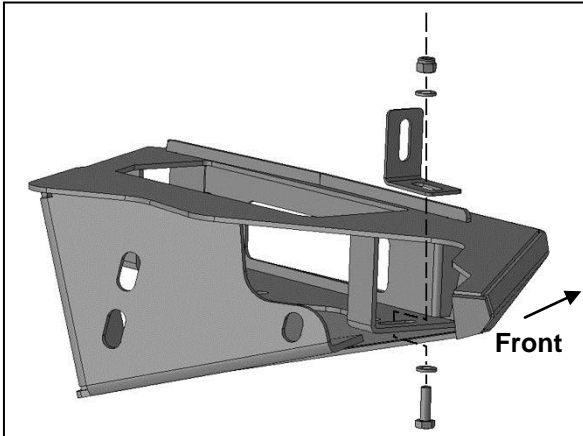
Attach LED light with single mounting bolt to center slot in inner mounting plate on Wing assembly (arrow)
